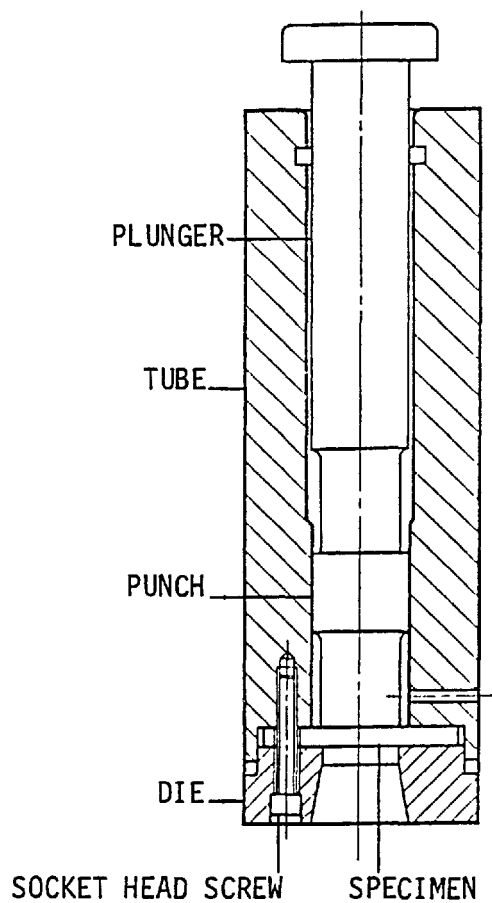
Sectional elevation of blanking tool assembly for quasi-static operations at elevated temperatures.
